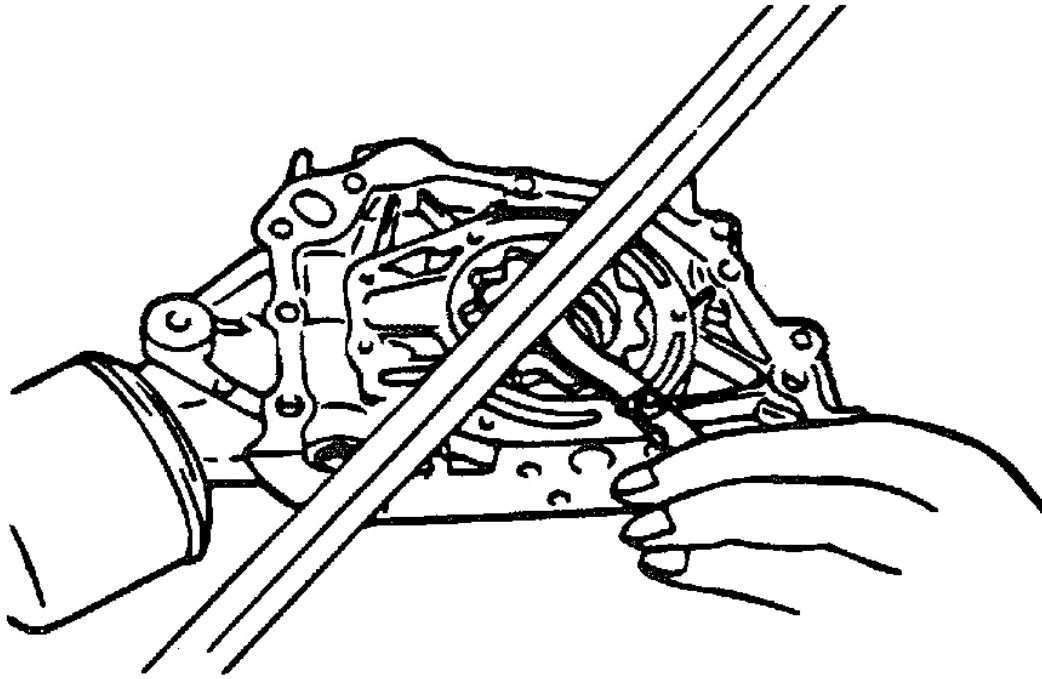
Checking Clearance Between Outer Gear & Front Case
